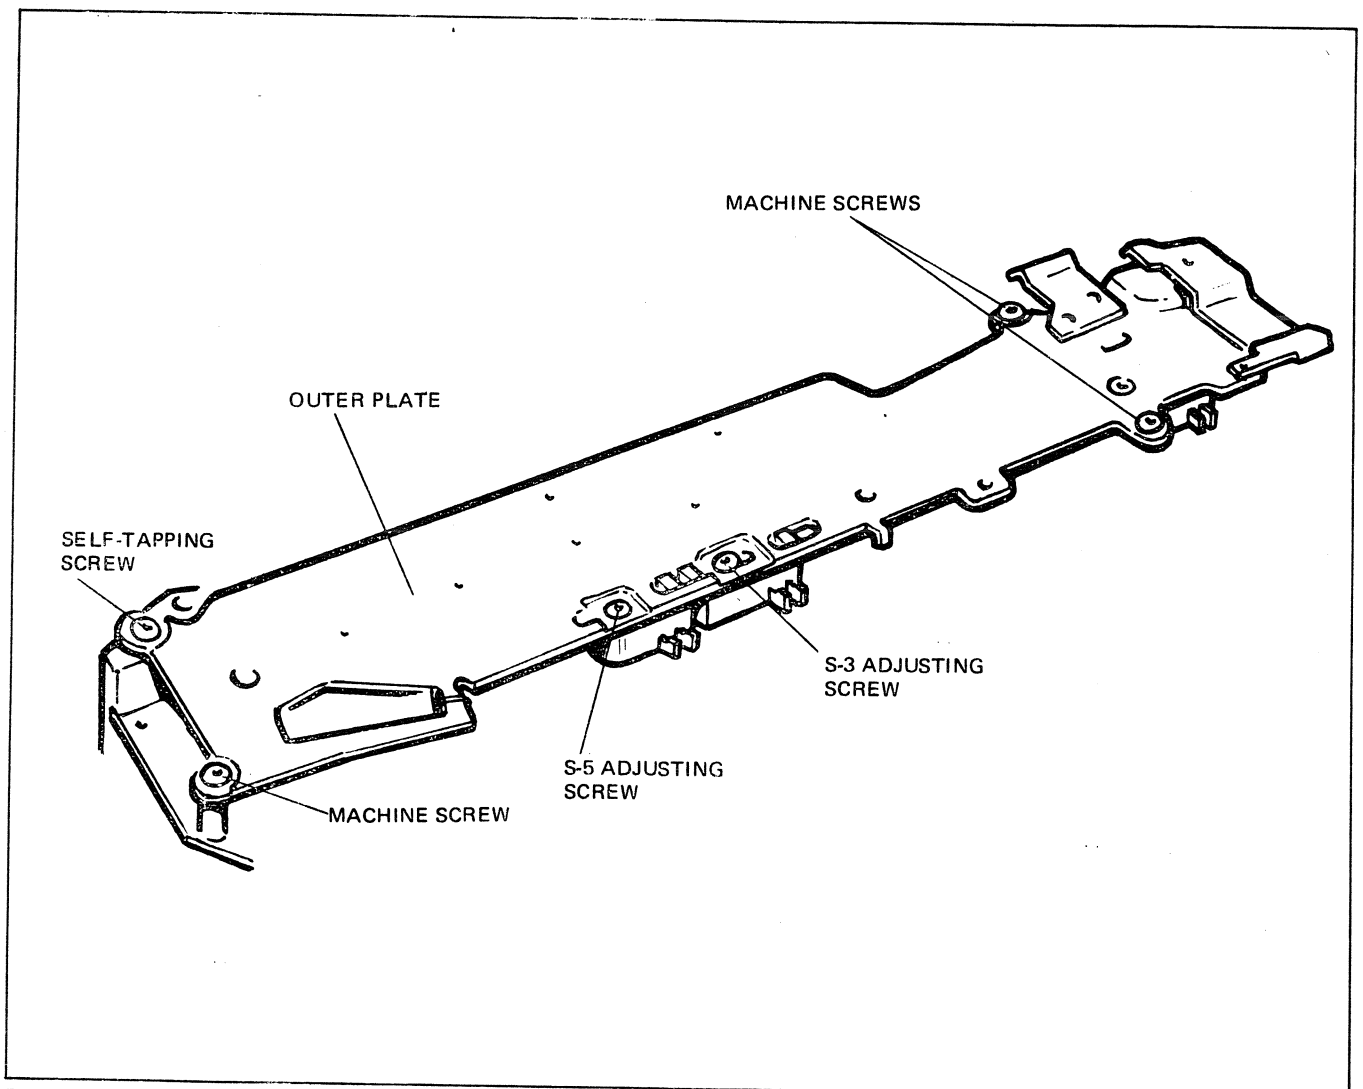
OUTER PLATE MOUNTING SCREWS
